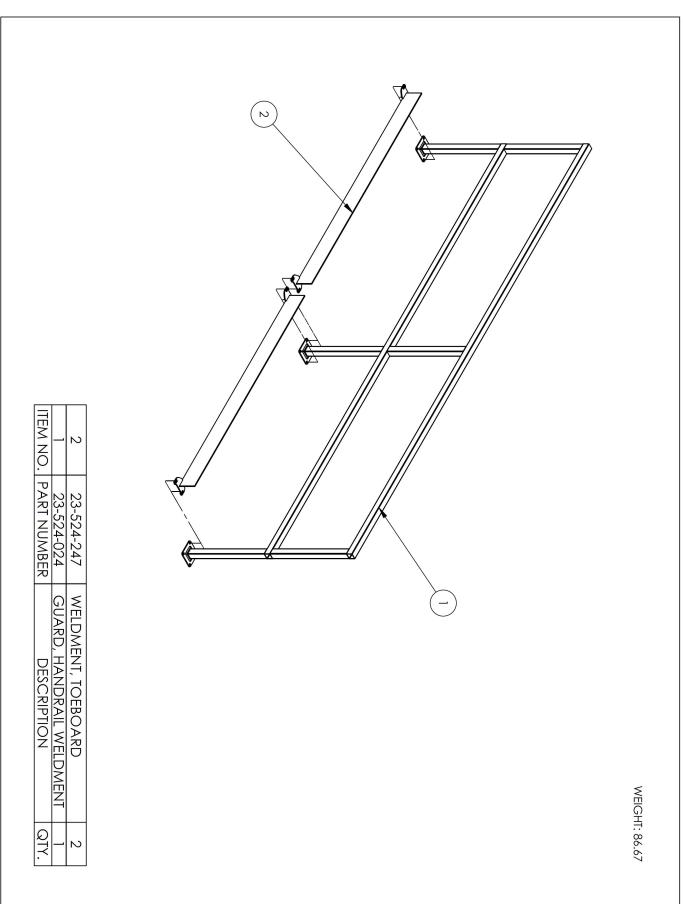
SQ-120-TB Exploded Parts Diagram and Bill of Materials
